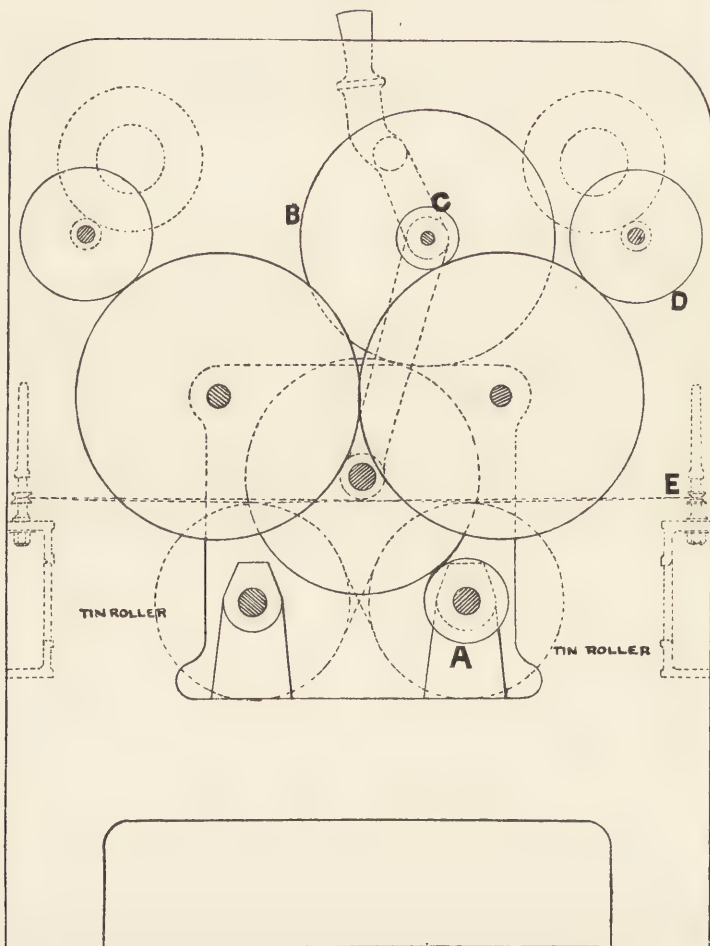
END VIEW SHOWING GEARING OF RING SPINNING FRAME.
